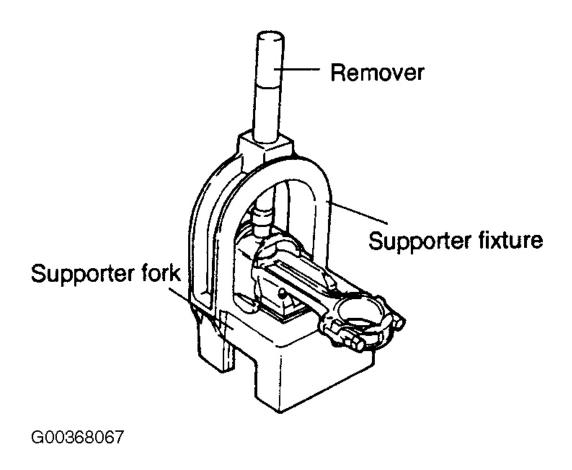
Piston Pin Removal Fixture Courtesy of KIA MOTORS AMERICA, INC.
